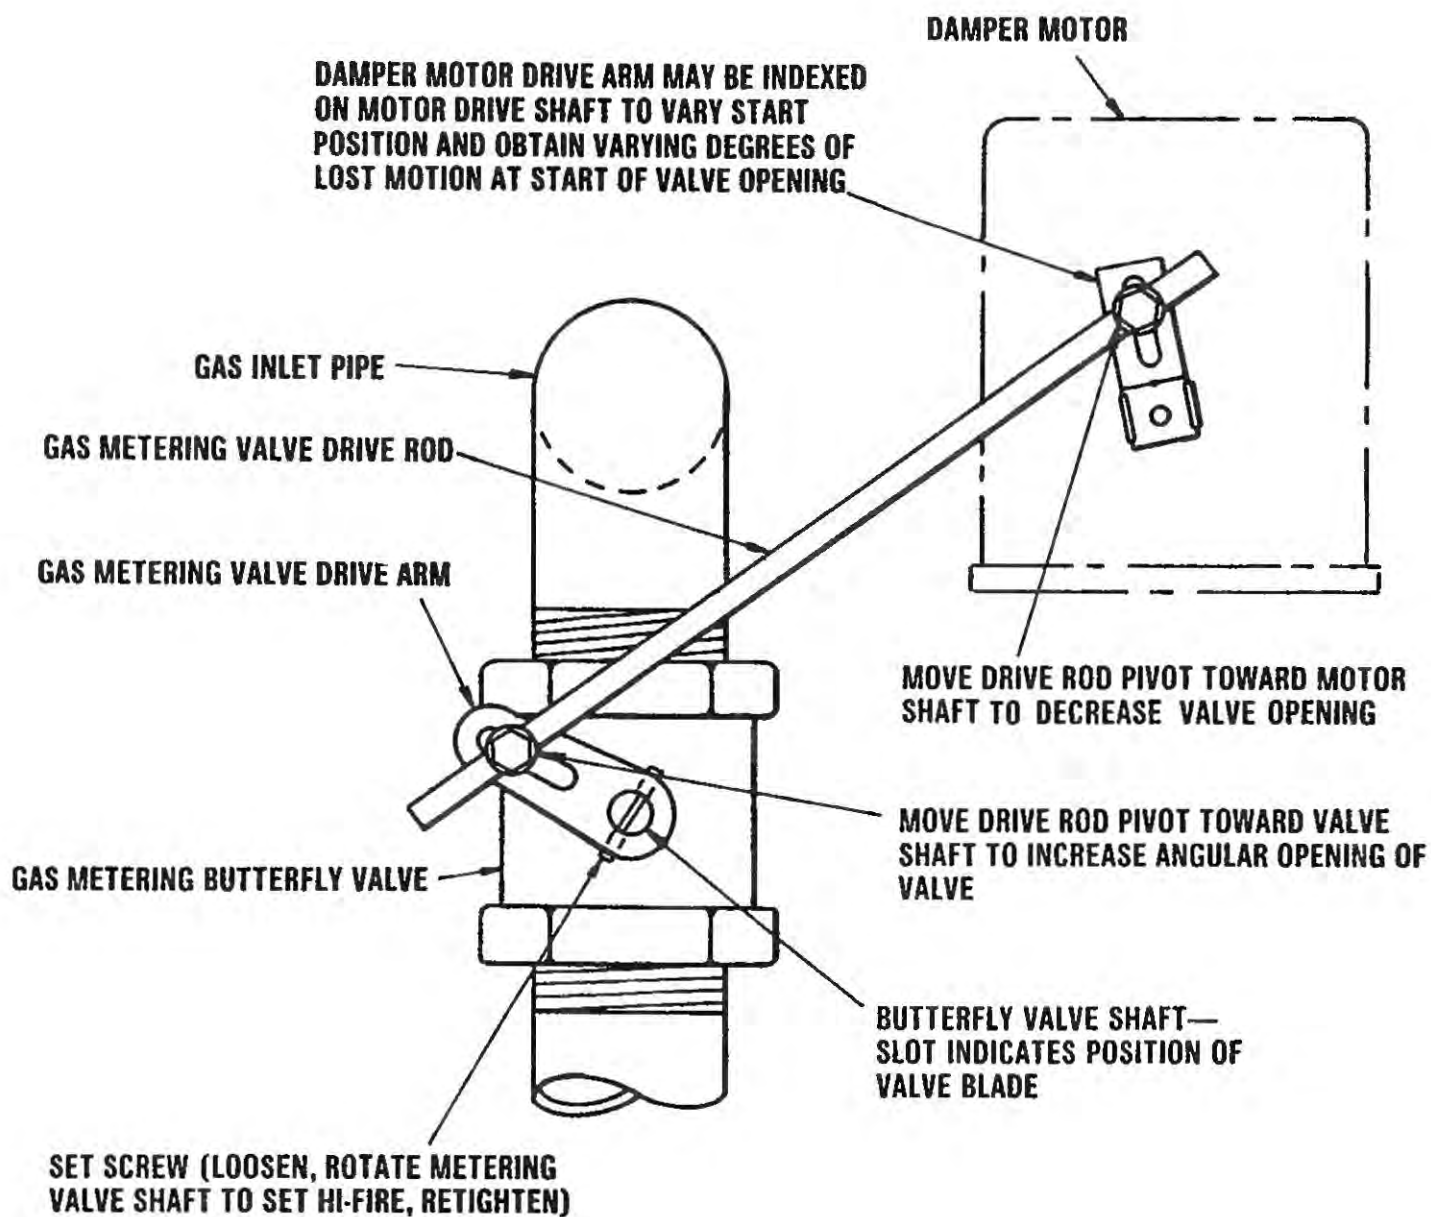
GAS METERING VALVE DRIVE ADJUSTMENTS HI-LO FIRING BURNERS.
